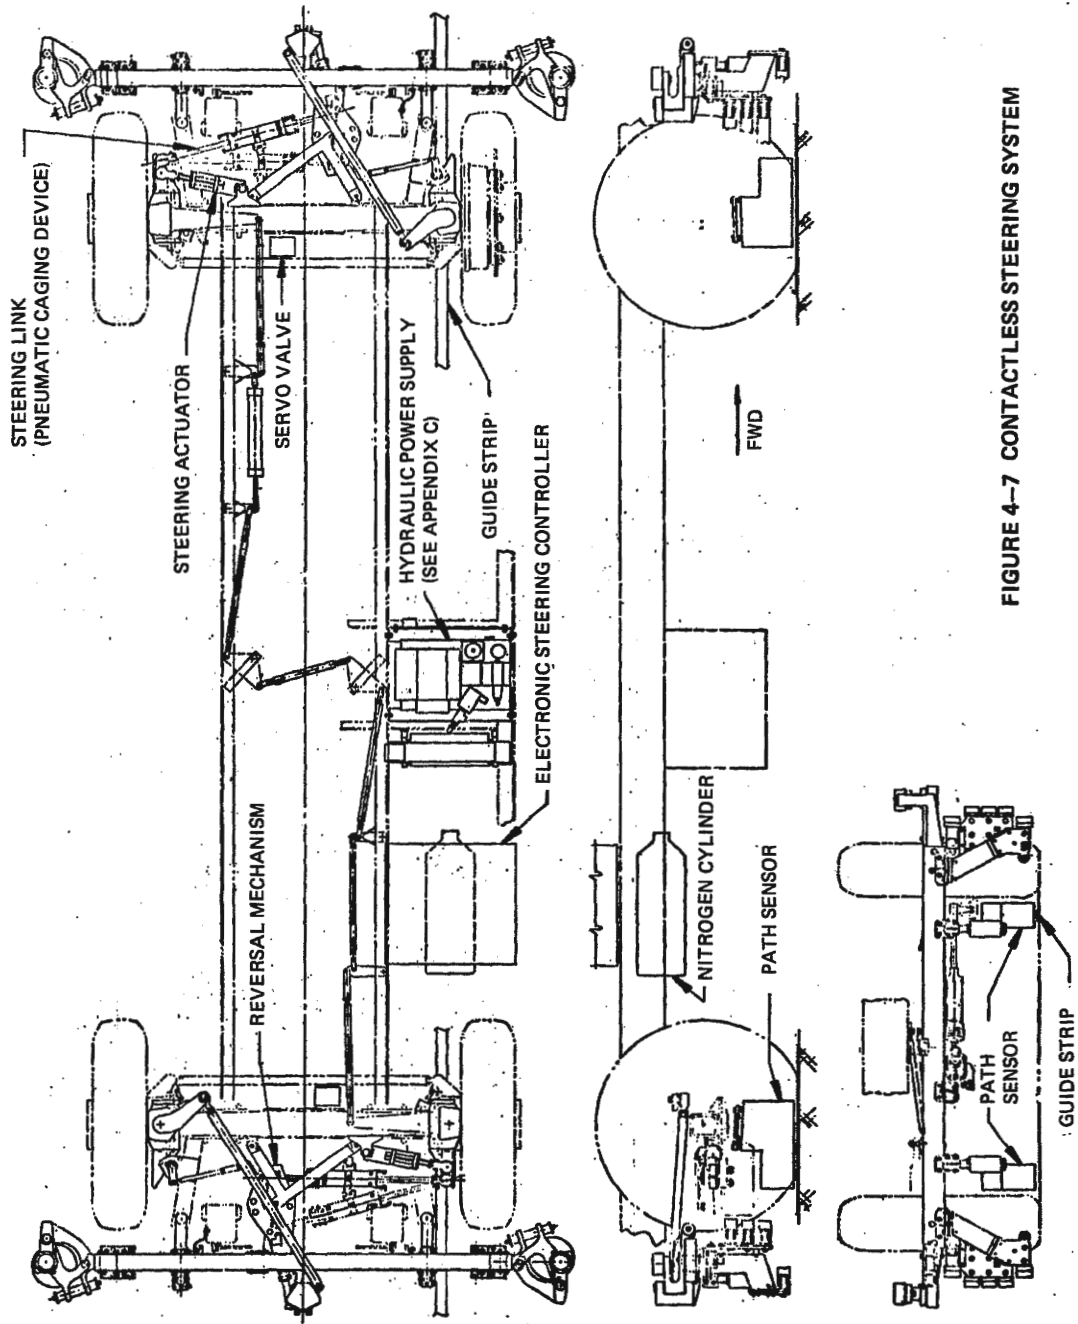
CONTACTLESS STEERING SYSTEM
